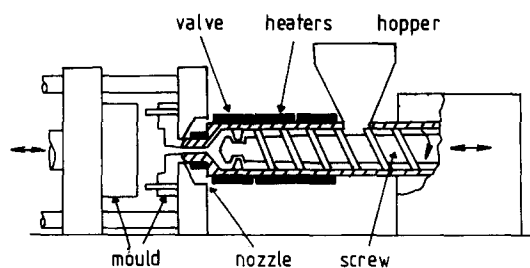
(b). Reciprocating screw-type injection moulding machine.
